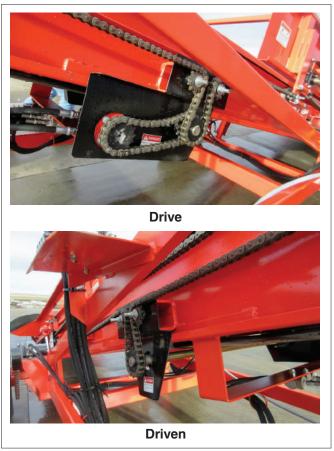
EXTEND/RETRACT ROLLER CHAINS
